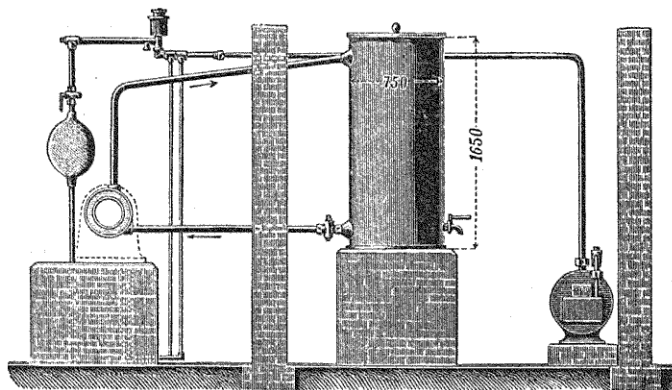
Arrangement of cooling tank with a 2 h.-p. engine.
